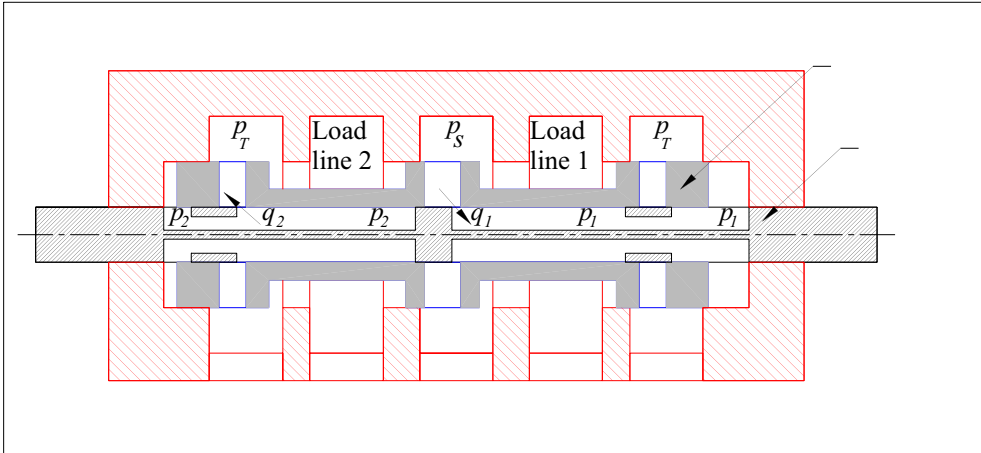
Cross section in three land spool valve with through axial pilot shaft
